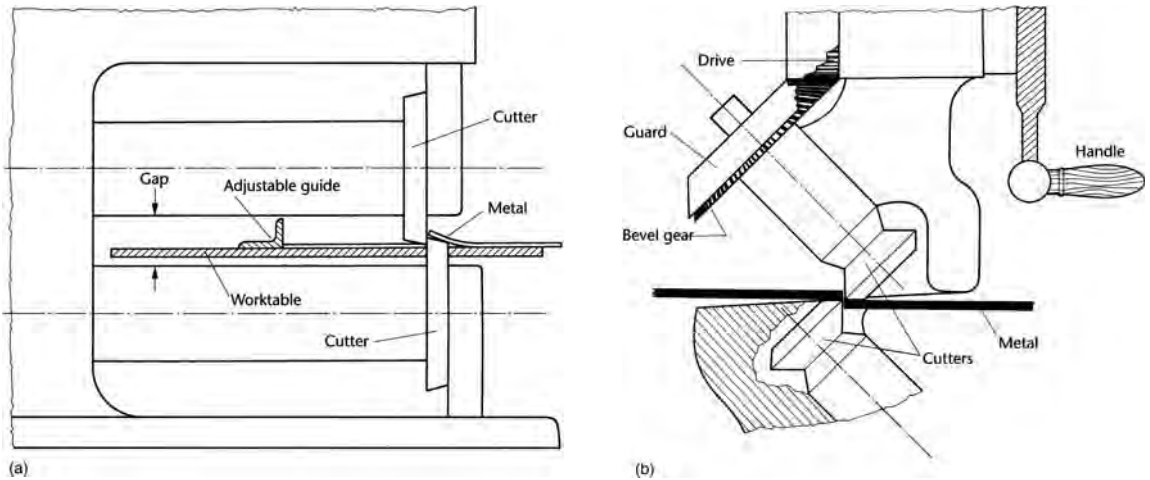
Rotary shears. (a) Bench rotary machine for straight-line cutting (horizontal spindles); (b) hand-operated rotary throatless shear (inclined spindles)
